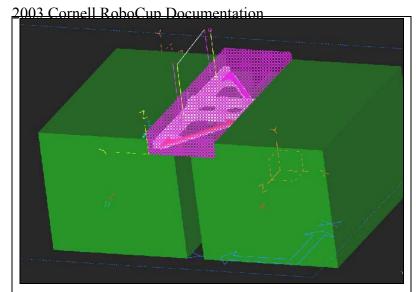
Setup of kicker manufacturing. The green block is the fixture, the magenta block is stock, and the pink is the kicker
